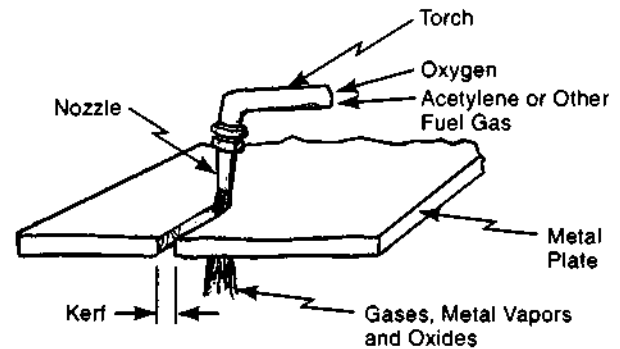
H1 Schematic view of oxy-fuel gas cutting (OFC).
